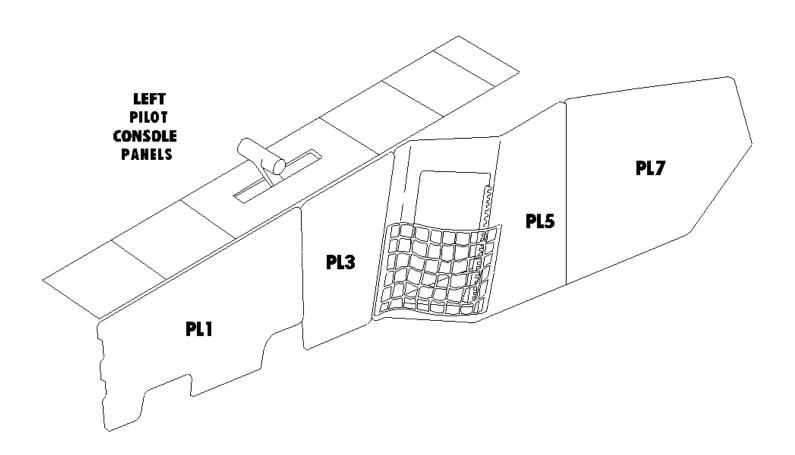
Inspection Access Provisions (Sheet 7 of 8)
